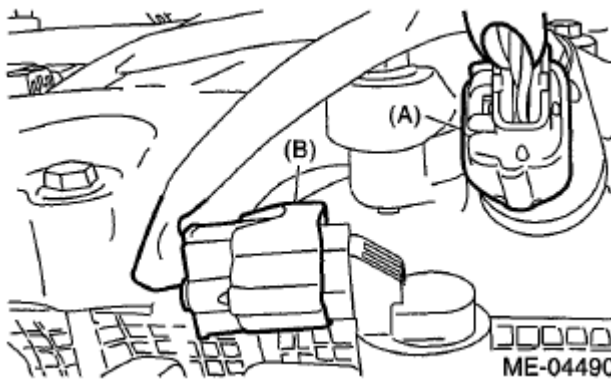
Identifying Exhaust Oil Flow Control Solenoid Valve Connector And Exhaust Camshaft Position Sensor
